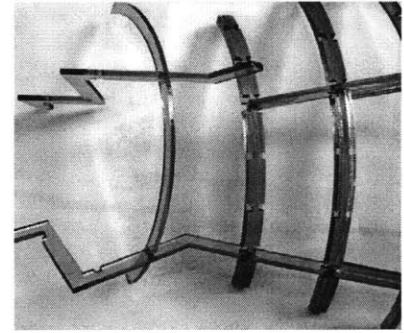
Broken Plexiglas model due to tolerance failure
